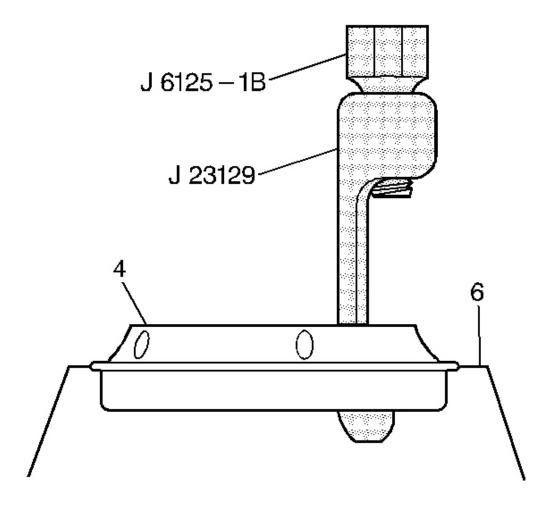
Removing Right Front Wheel Drive Shaft Oil Seal Courtesy of GENERAL MOTORS CORP.
